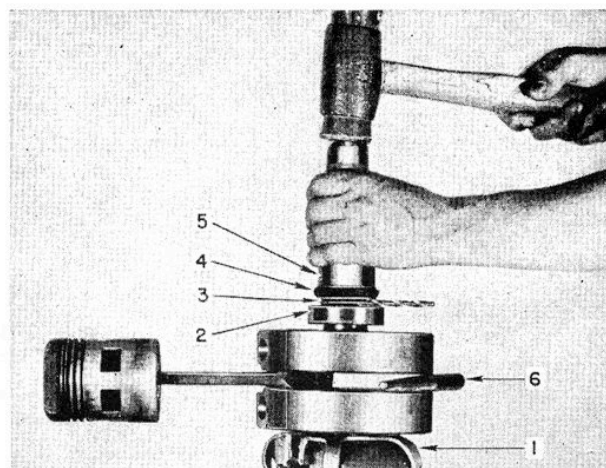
REPLACING CRANKSHAFT OIL SEAL
